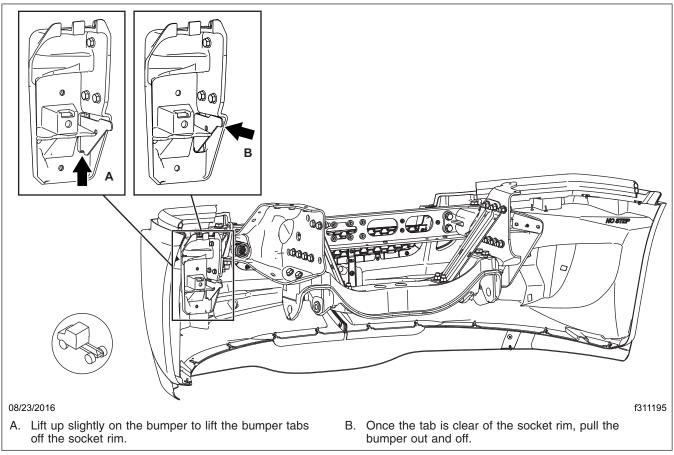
, Aerodynamic Bumper Removal, Mounting Tabs
